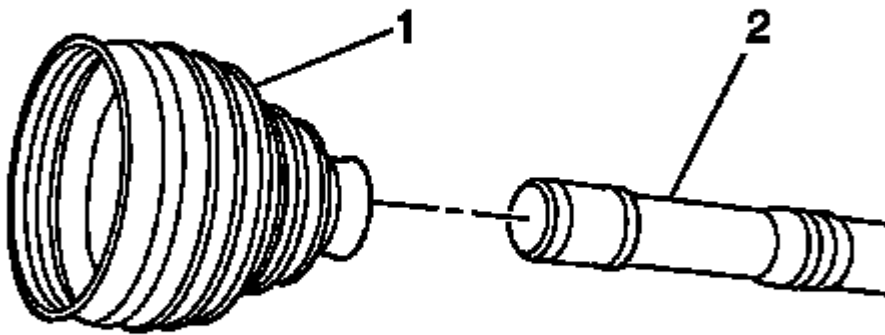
Identifying Clamp & Wheel Drive Shaft
